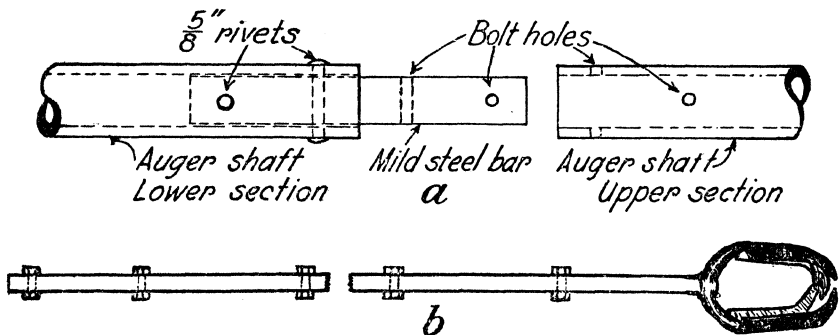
Coupling and shaft. *a*, A solid coupling for shafts made in sections; two bolts are removed to take the shaft apart; *b*, the bolt shaft, one of the most useful shafts we have used. This shaft stands more rough use than any other shaft tried. Permanent bolts or rivets transfix the shaft at 3-foot intervals. The turning handles never damage this shaft. The bolt heads act as lugs for the handles to push against.
